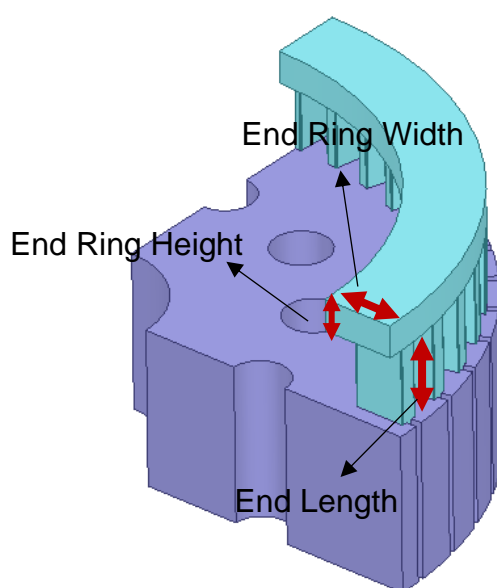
3D Schematic of the Rotor Bar and Rotor End Ring Connection of the Reference Test Motor
